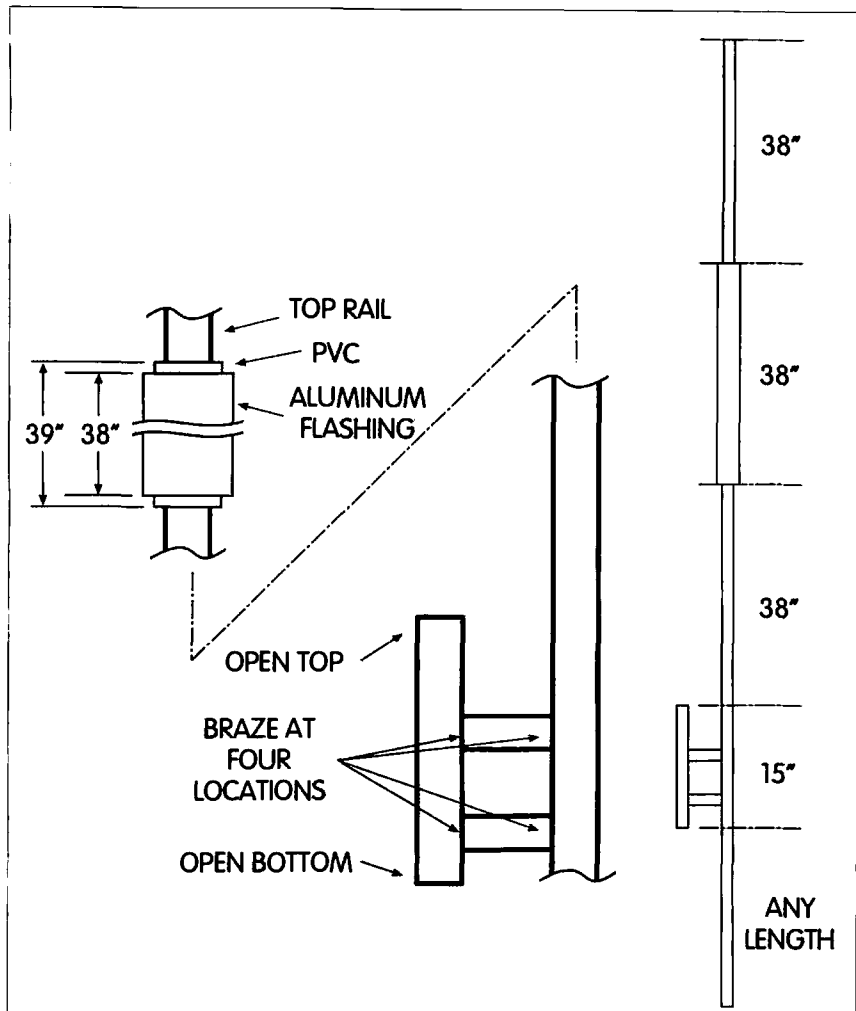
Overall dimensions and construction details of the coaxial vertical.
